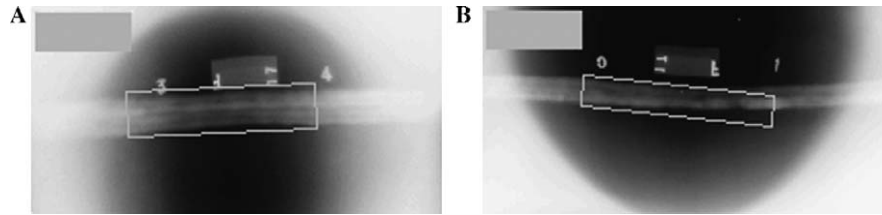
(A) The length of the detected weld bead is incomplete. (B) The weld bead detection missed some part of the weld bead edge along the effective bead length (L).
